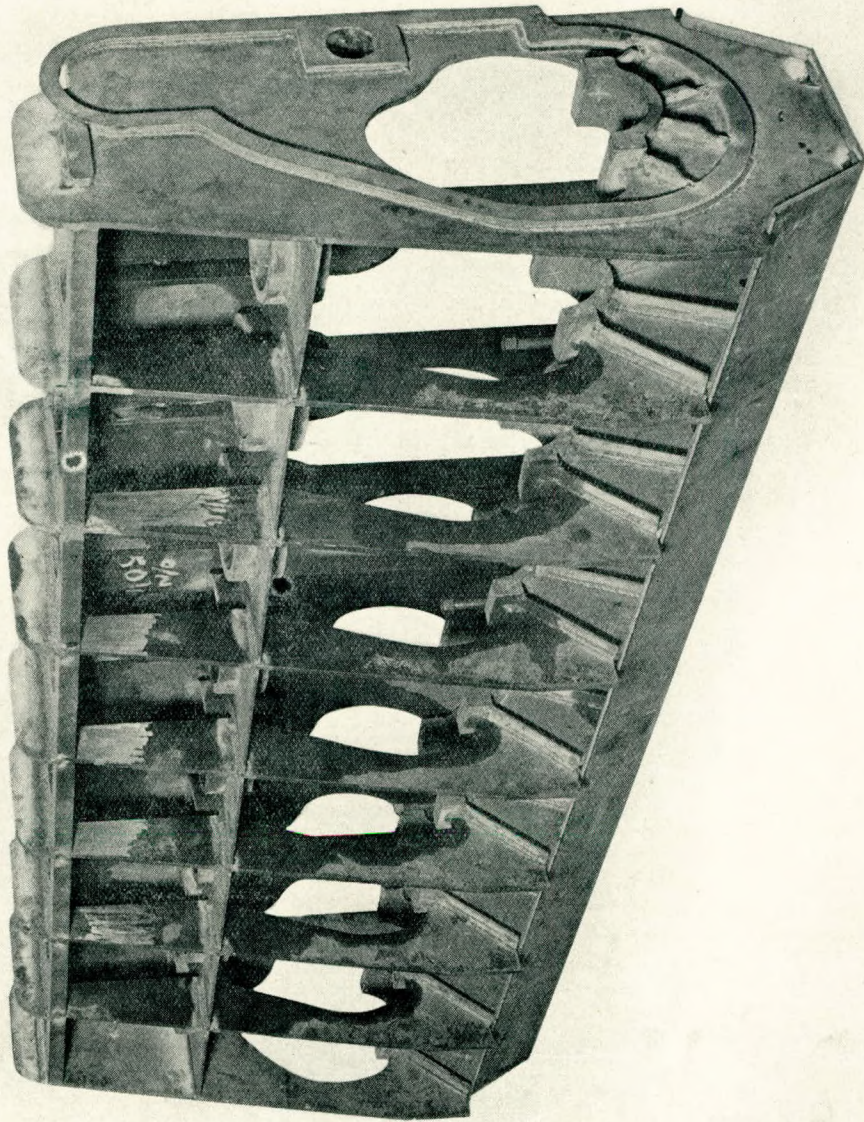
320-b.h.p. auxiliary engine. View before outer plate is fitted.
